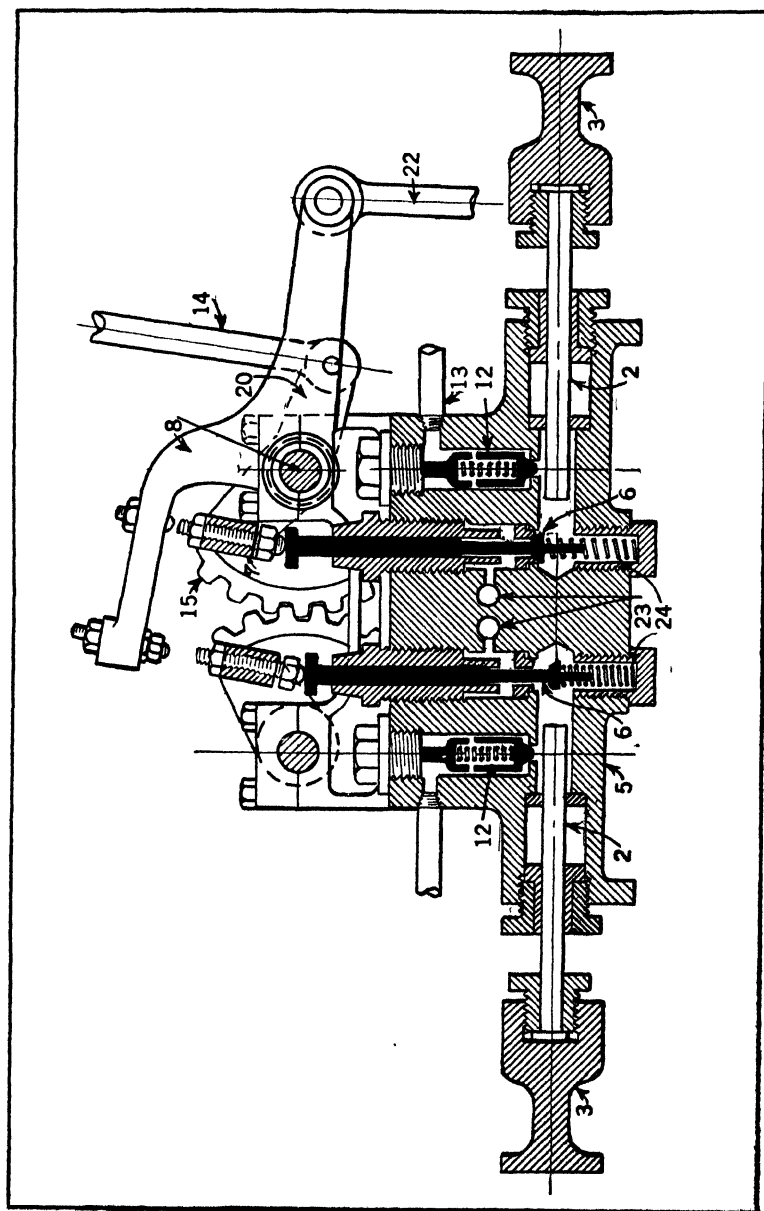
Longitudinal Section Through Busch-Sulzer Marine Type Fuel Pump
